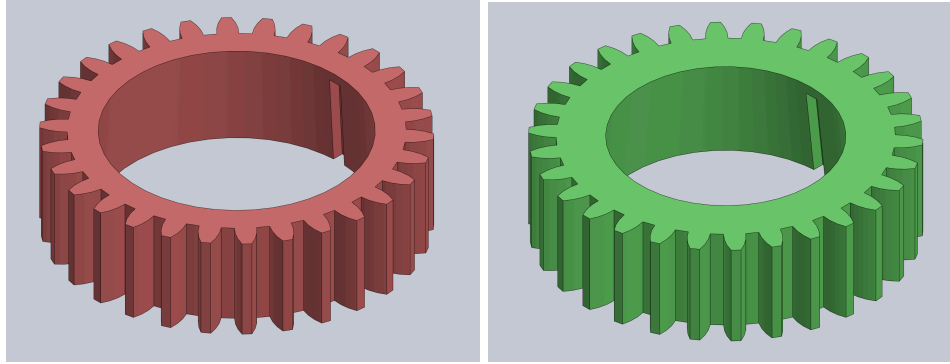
Solidworks model of knob gear 1. Figure 23: Solidworks model of knob gear 2.
